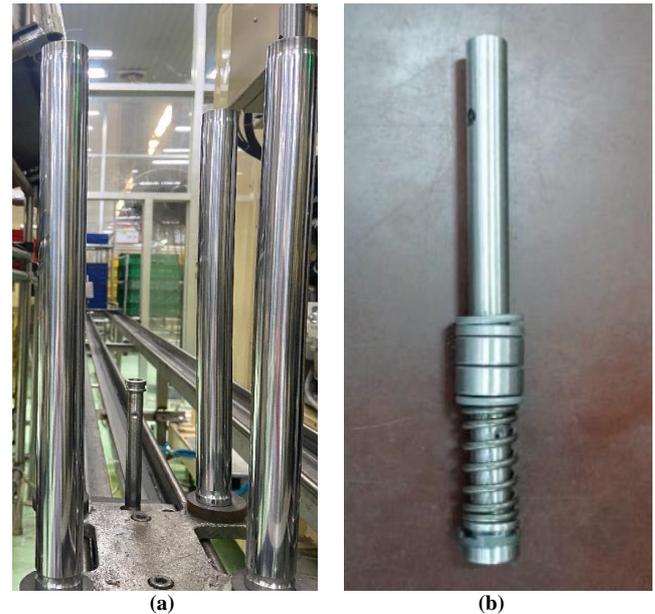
(a) Inner tube K1AA, (b) Cylinder Complete Assy
